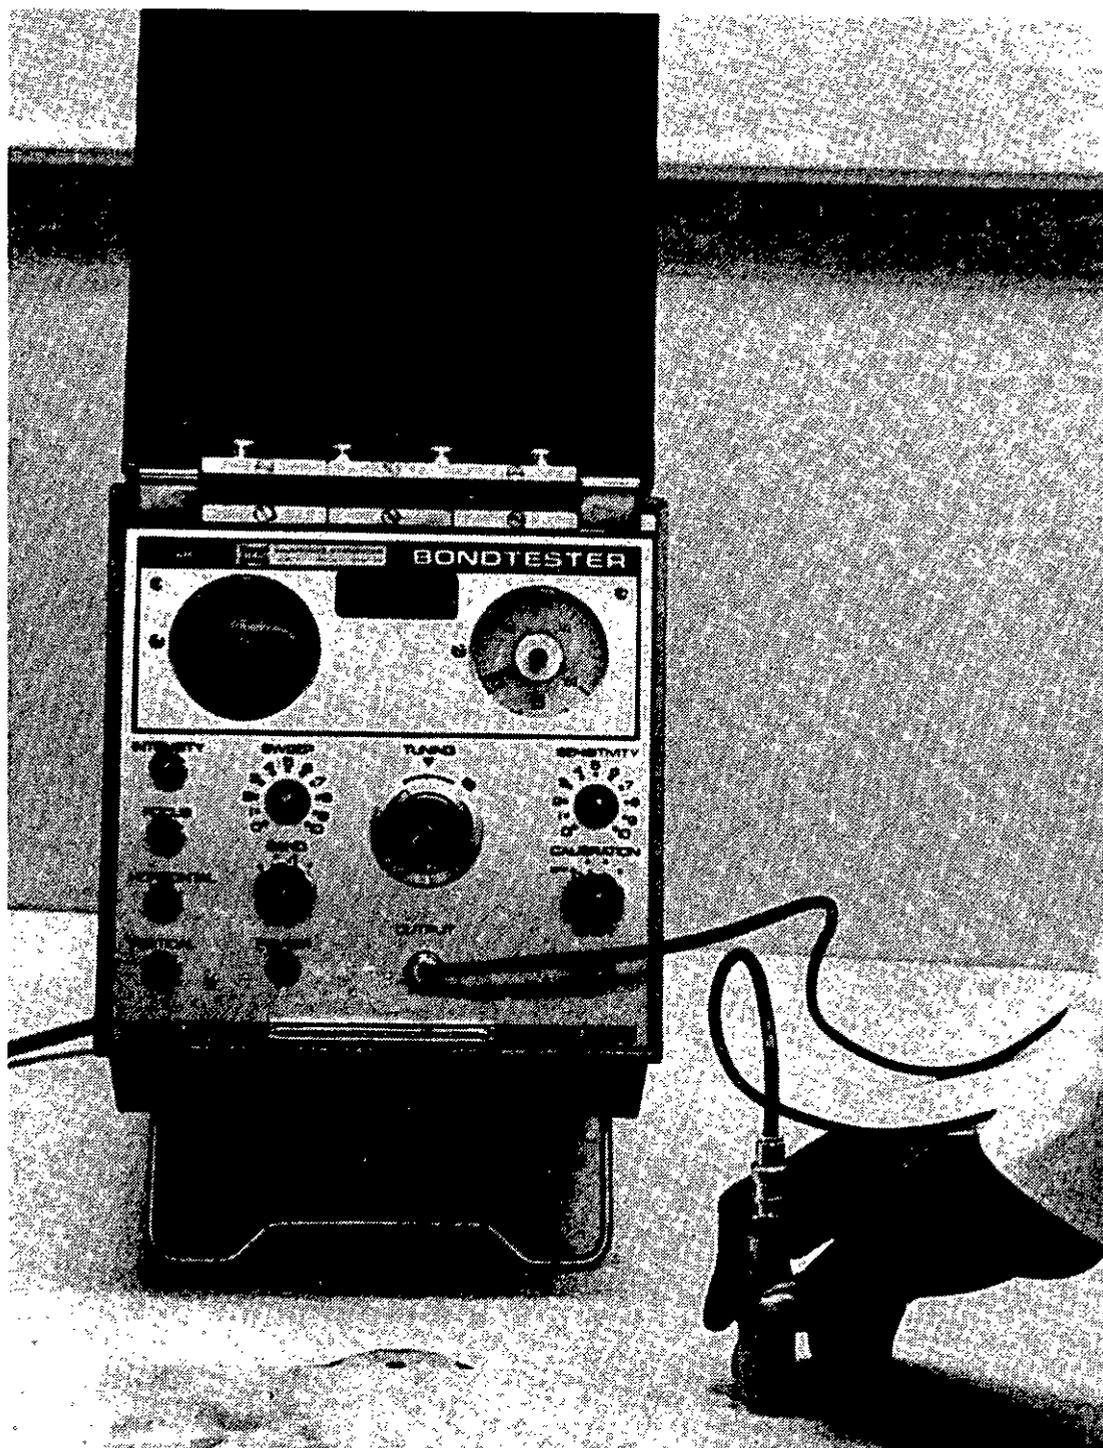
Fokker bond tester being used to inspect metal laminate.
